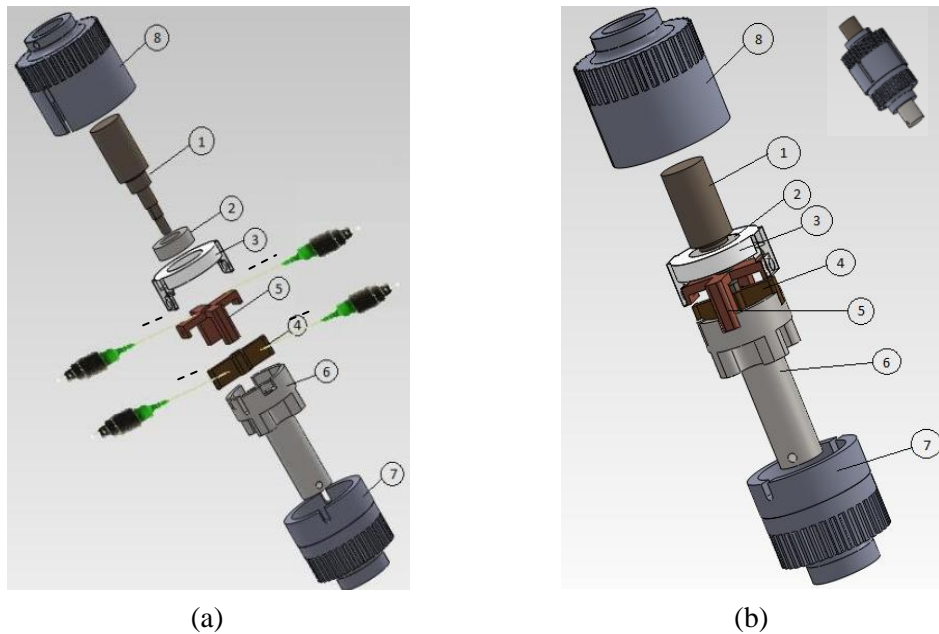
2-DOF force/torque sensor with radial FBG installation, first design: (a) exploded view, (b) assembled sensor (1- square cross section shaft for torque transmitting; 2- ball bearing; 3- part for transmitting axial force; 4- active element for axial torque; 5- active element for axial force; 6- base and shaft; 7 and 8 are casings).
